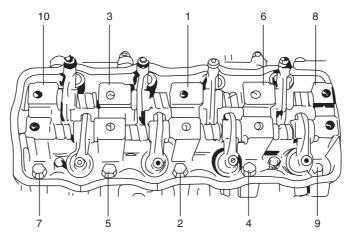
Tightening Sequence of Cylinder Head Bolts
